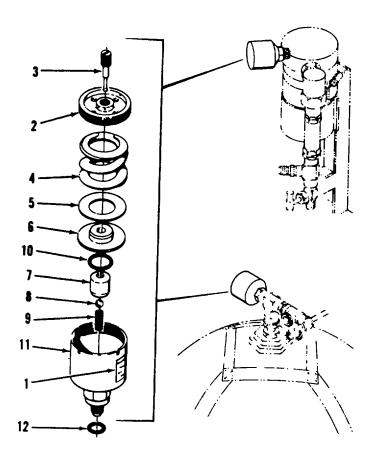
Pneumatic Lines and Fittings - Exploded
